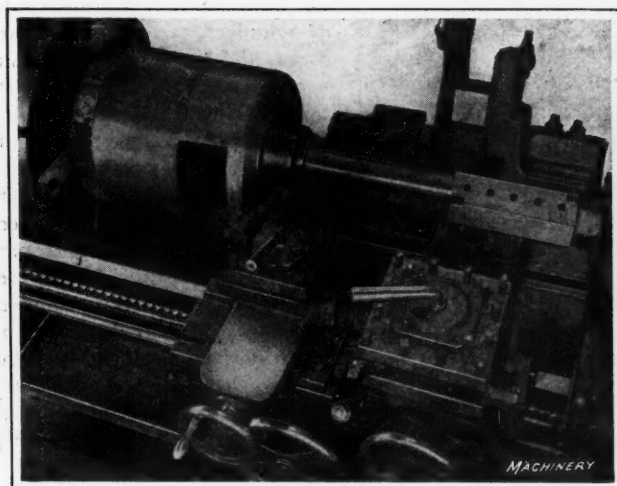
Method of holding Motor Frame (Fig. 24) for First Operation
